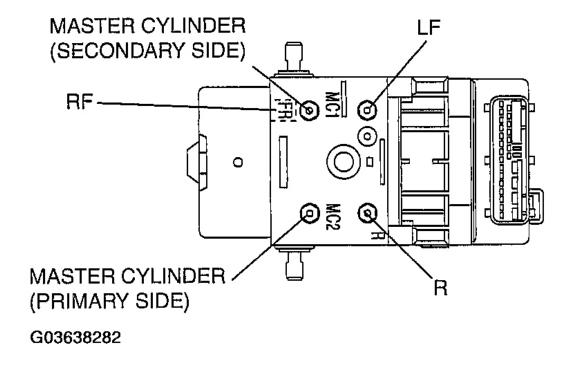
Identifying Brake Pipe Connecting Positions Courtesy of MAZDA MOTORS CORP.
